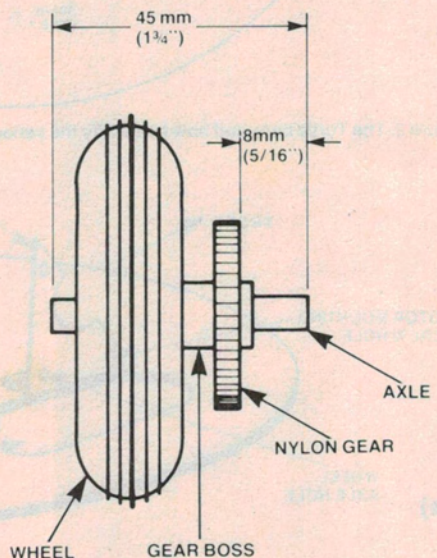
Wheel assembly. Wheel hub butts against gear boss and the two are glued at this point.
